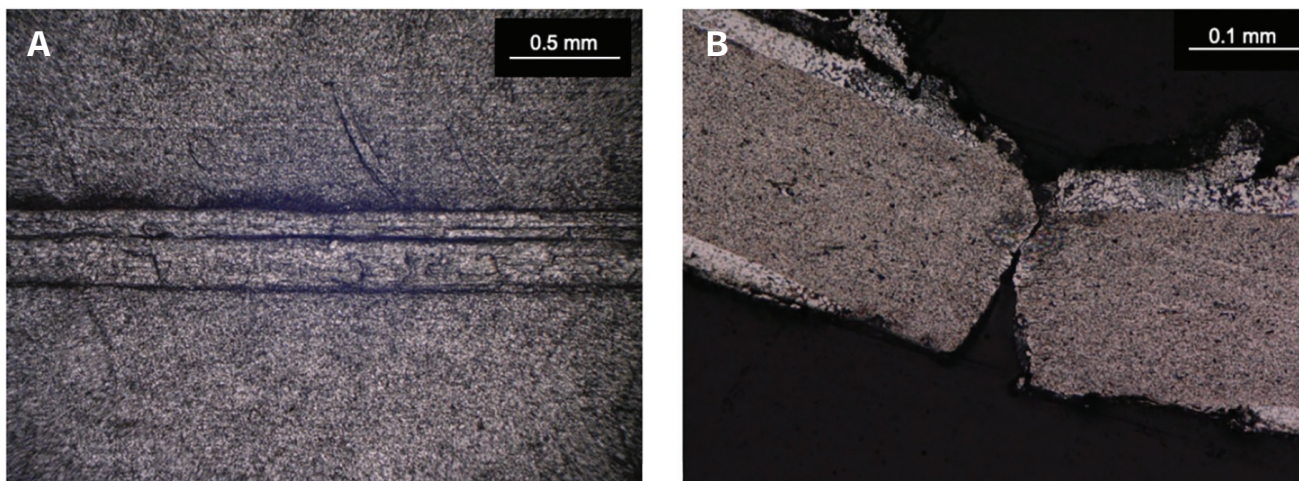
Specimens of a cold weld. A — Top view; B — cross-sectional view of the joint's cross section.
